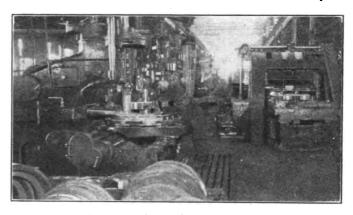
Powerful Ingersoll Vertical and Slab Millers Recently Installed for Heavy Rod Work
